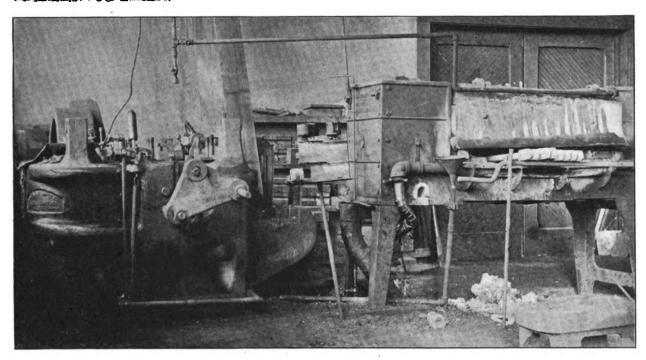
SHOWING THE HEATING FURNACE AND THE WELDING MACHINE IN THE WABASH SHOPS AT DECATUR
